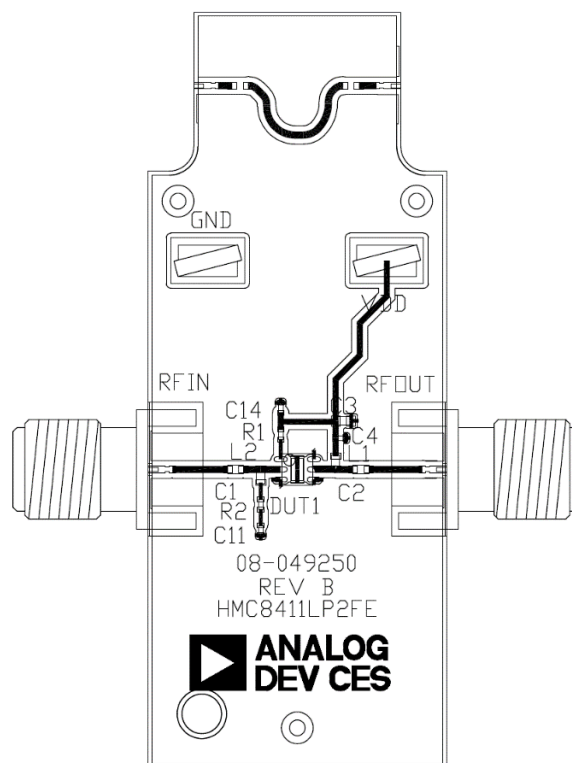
EV1HMC8411LP2F Printed Circuit Board (PCB)
